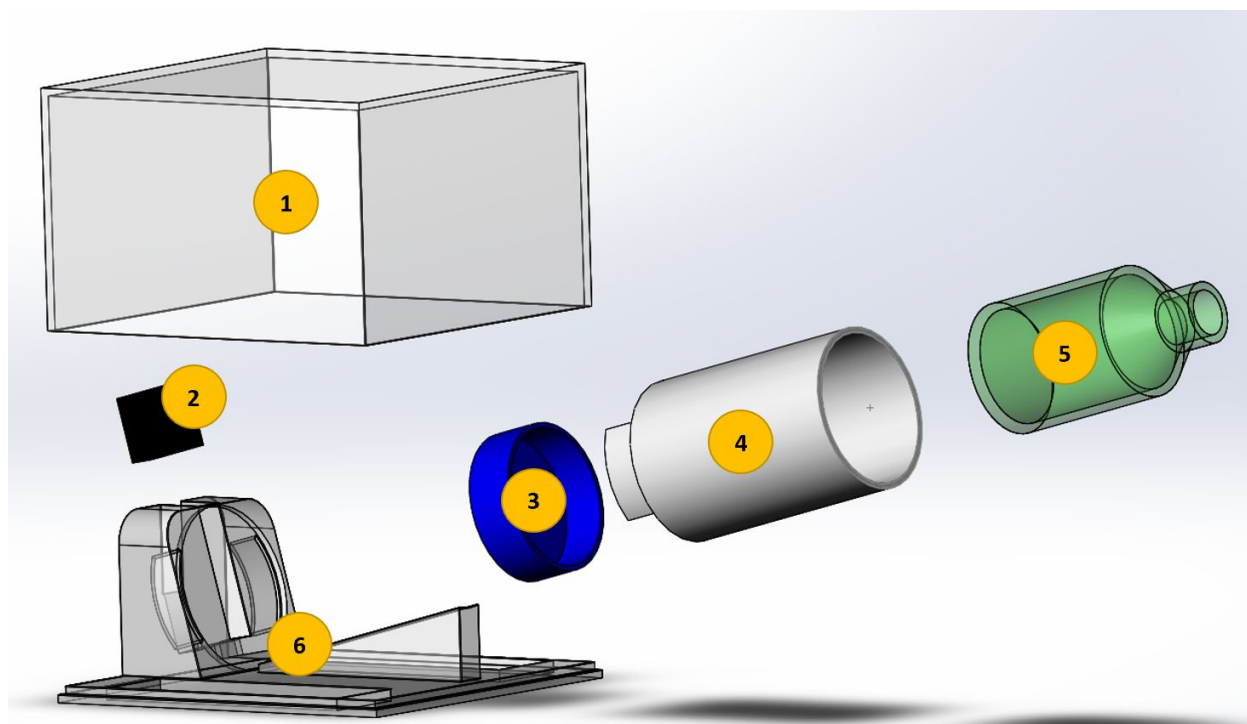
Exploded view of final prototype CAD model indicating each part
